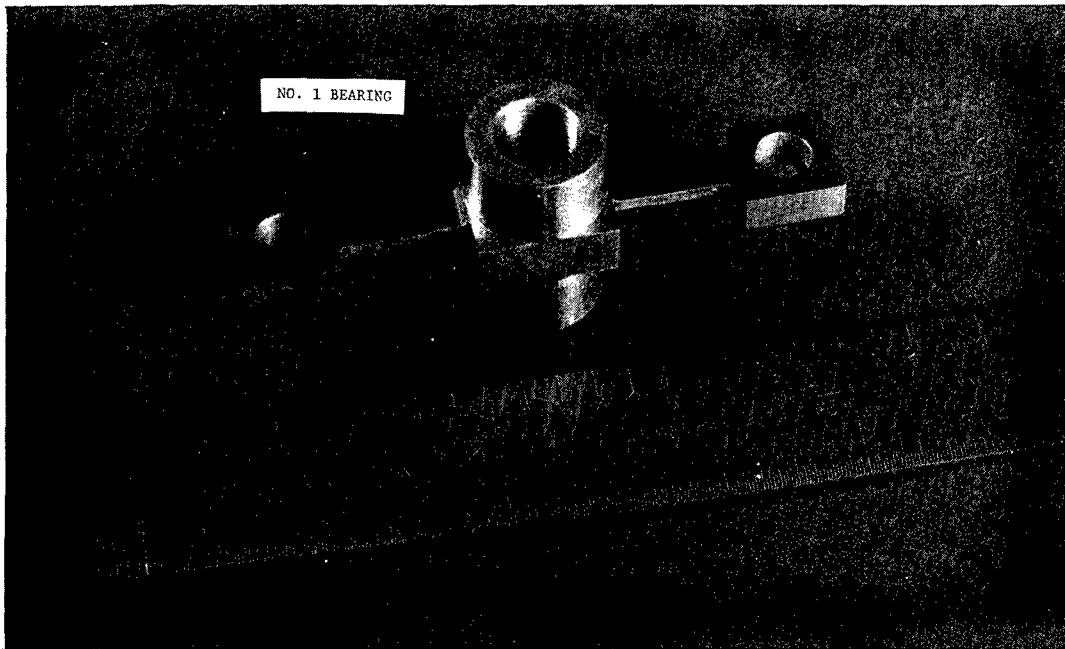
View Of Revised Upper Pivot-Support Flexures For The Second Design Of The No. 1 and No. 2 Journal Bearings
